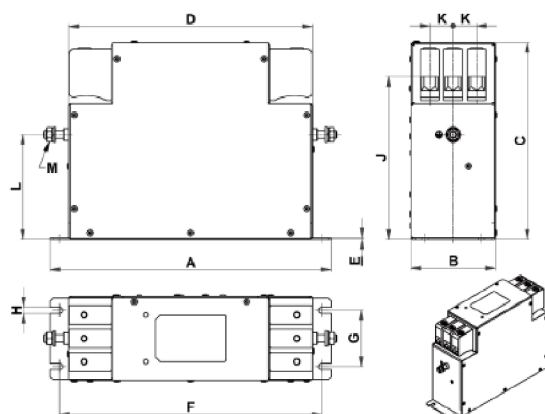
Dimension drawing of FN 3287 series filters (unit: mm)
